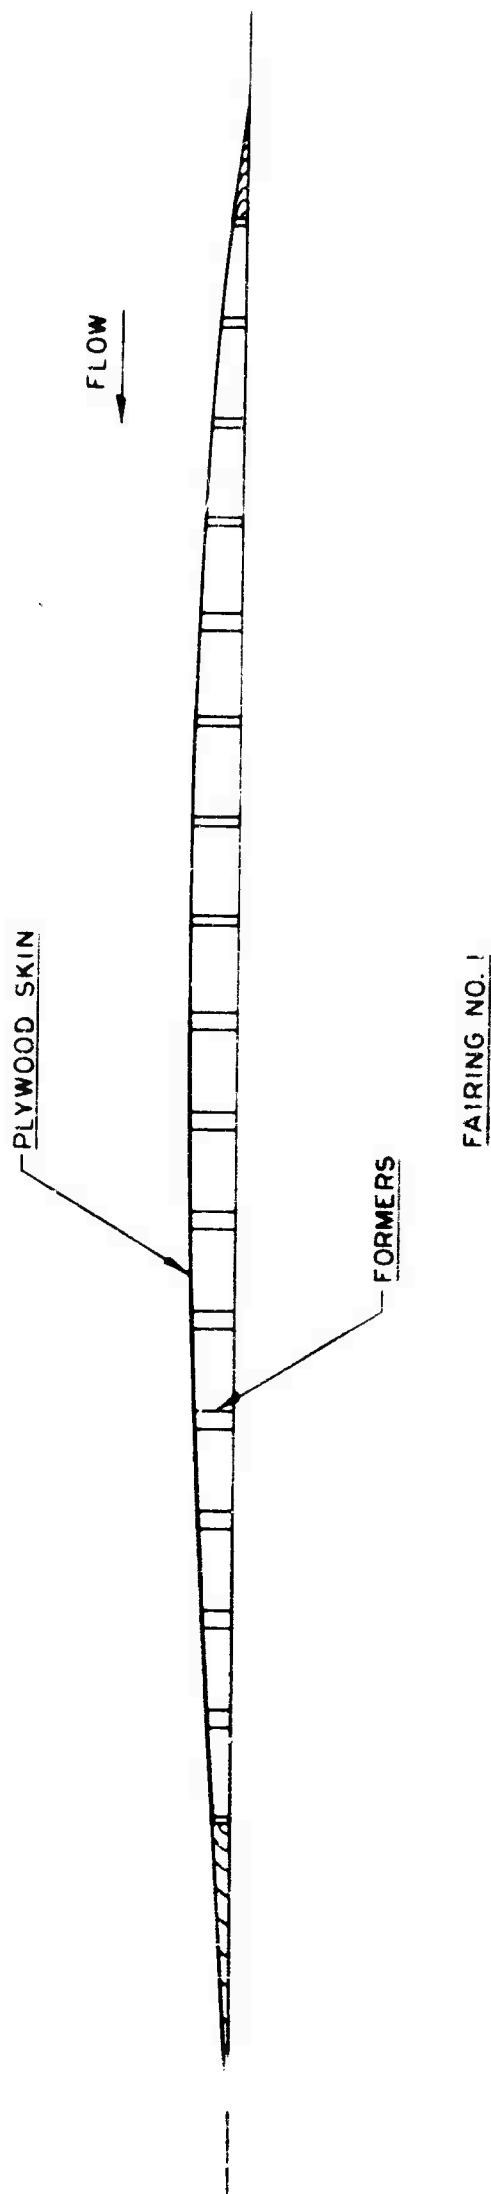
17-FOOT CHORD LAMINAR SUCTION WING IN NORAIR 7- BY 10-FOOT WIND TUNNEL WITH FAIRING NO. 1 INSTALLED
